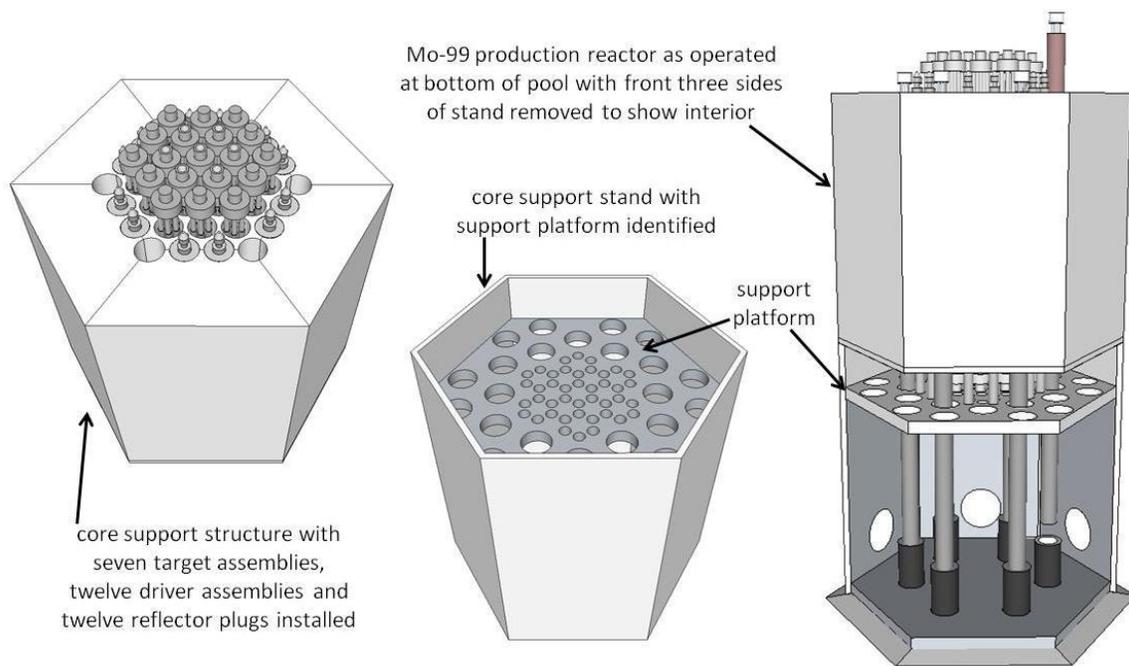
Core support structure with target and driver assemblies installed with core support stand.
